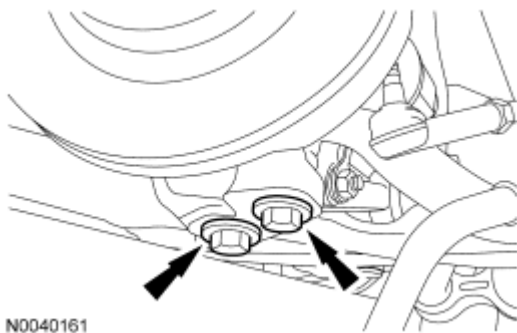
Locating Front And Rear Lower Control Arm Nuts
